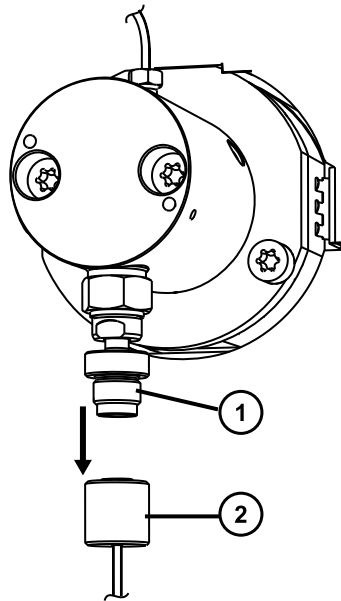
Unscrewing the cap nut from the ferrule holder fitting
